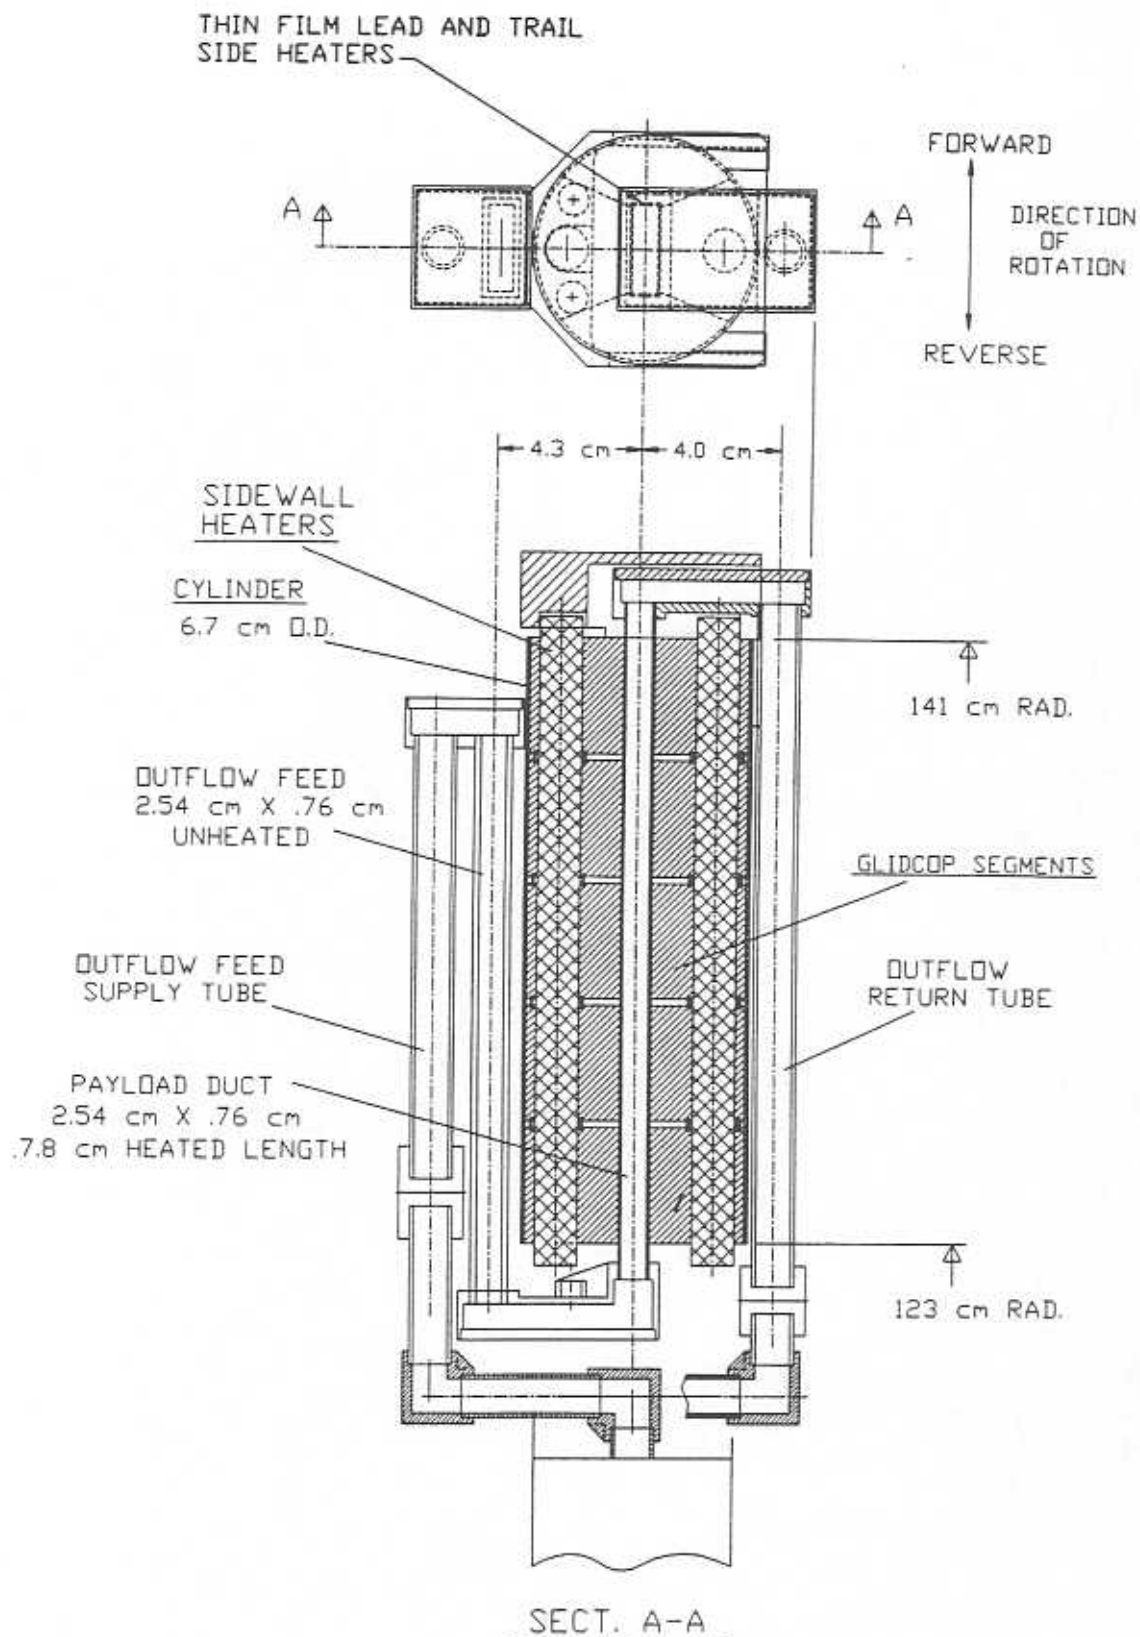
Rotating Bucket Rig with Mixing Ribs Cross Section
